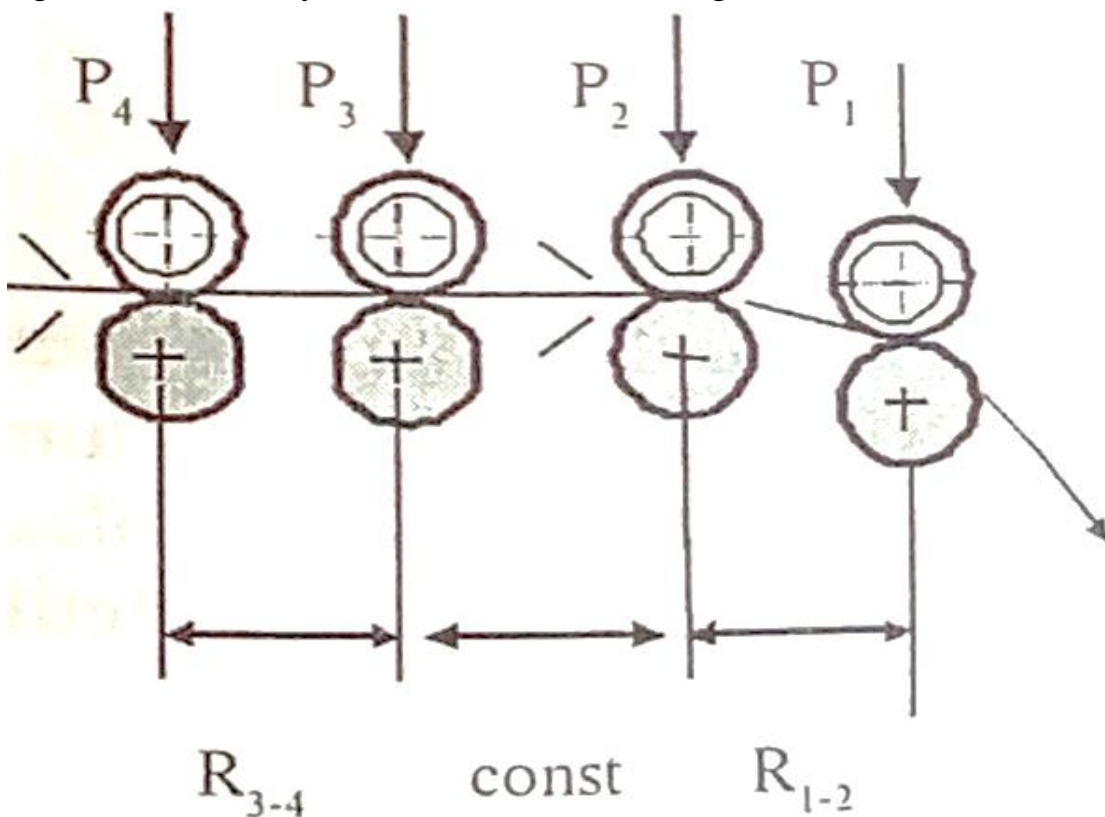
Stretching tool with three-cylinder compactor (R-260-3)
